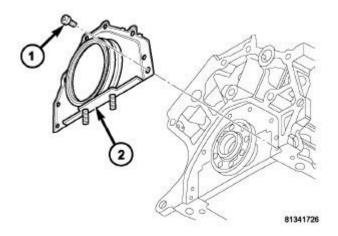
Oil Seal Retainer Courtesy of CHRYSLER LLC
